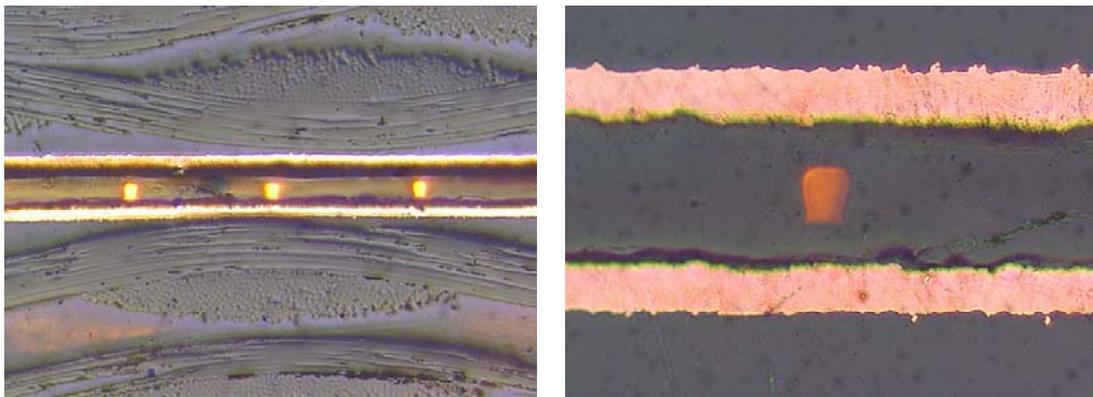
Cross sectional view of a PCB containing an optical waveguide layer.
